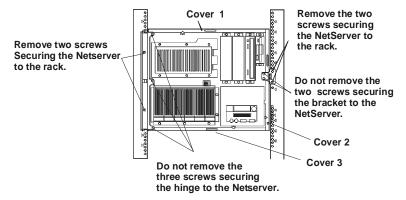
Front of LH 3000r Screw and Cover Locations
